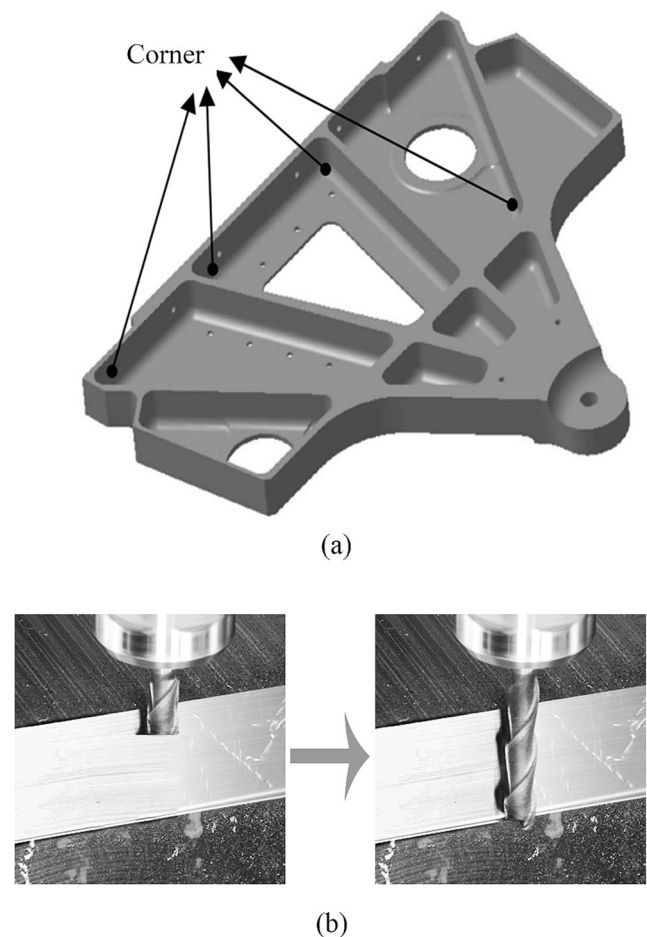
High-speed deep milling of pocket mold: a pocket mold with multiple transition corners and b deep milling
